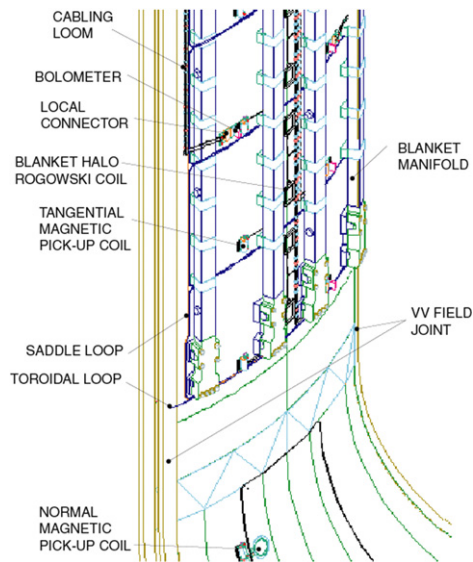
Part of the inboard vacuum vessel with blanket and divertor removed, showing diagnostic sensors (magnetic pick-up coils and bolometers) positioned near blanket gaps and cabling looms running alongside the blanket cooling manifolds.
